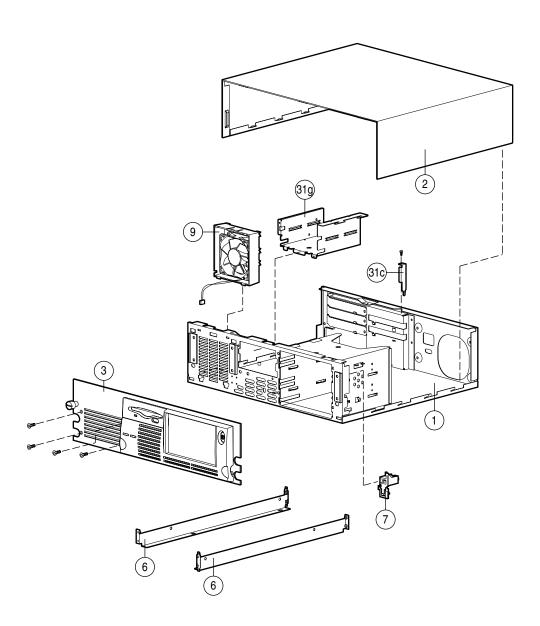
Mechanical Parts Exploded View of the Compaq ProLiant 850R 6/200N
